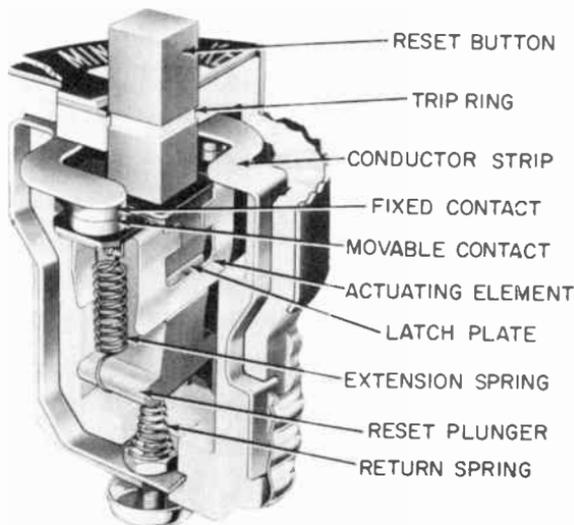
A cross-sectional view of a mini-breaker showing its internal construction. (Courtesy of Mechanical Products Inc.)
